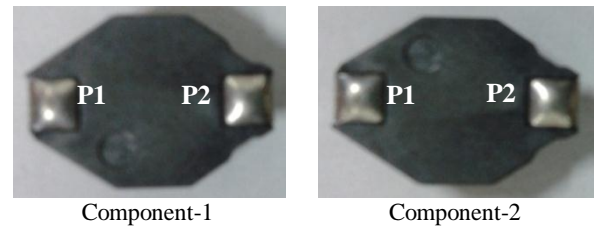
Two components to investigate the gold thickness after wave soldering.
